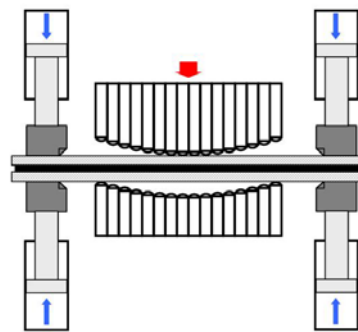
Configuration of deformed blank obtained from experiment using large flexible forming machine
